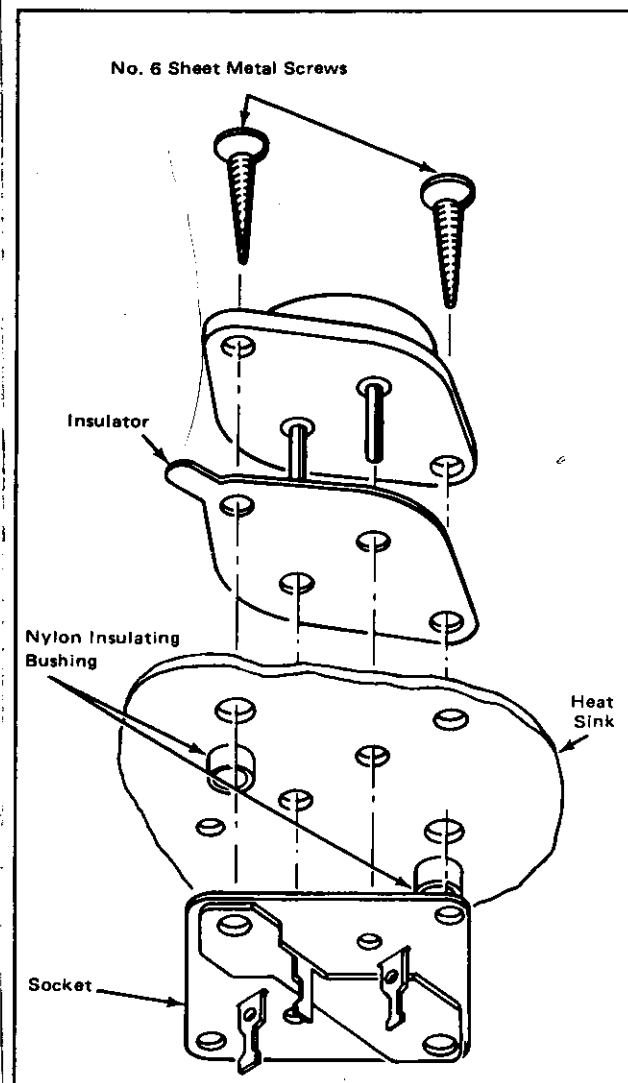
Mounting Details for Flange Mounted Semiconductors (TO-3 shown).
